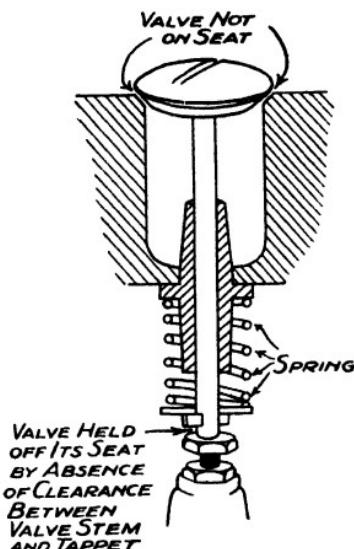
BEFORE GRINDING IN A VALVE MAKE SURE THAT THE TAPPET IS NOT HOLDING THE VALVE OFF ITS SEAT.
